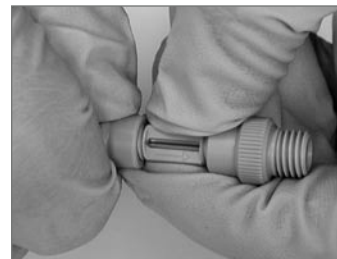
Gripping the column holder, securely tighten the end cap containing the nanofilter (inlet end of the assembly)
